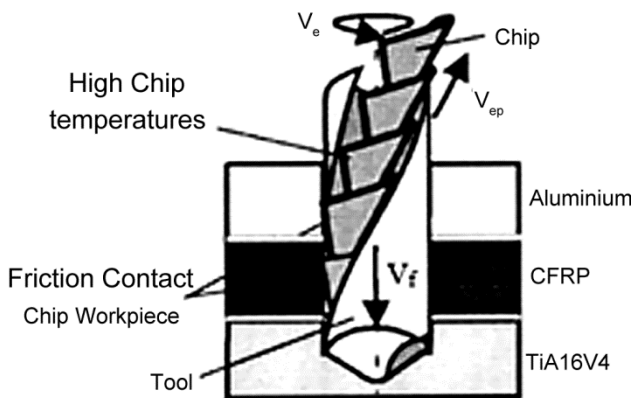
Chip removal problems when drilling multi material<sup>33</sup>.
